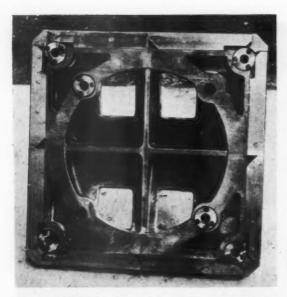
Underside view of Renault transfer machine fixture platen. The 2 sets of outer bushes locate the fixture at 90°. The inner bushes locate at the indexing station.
